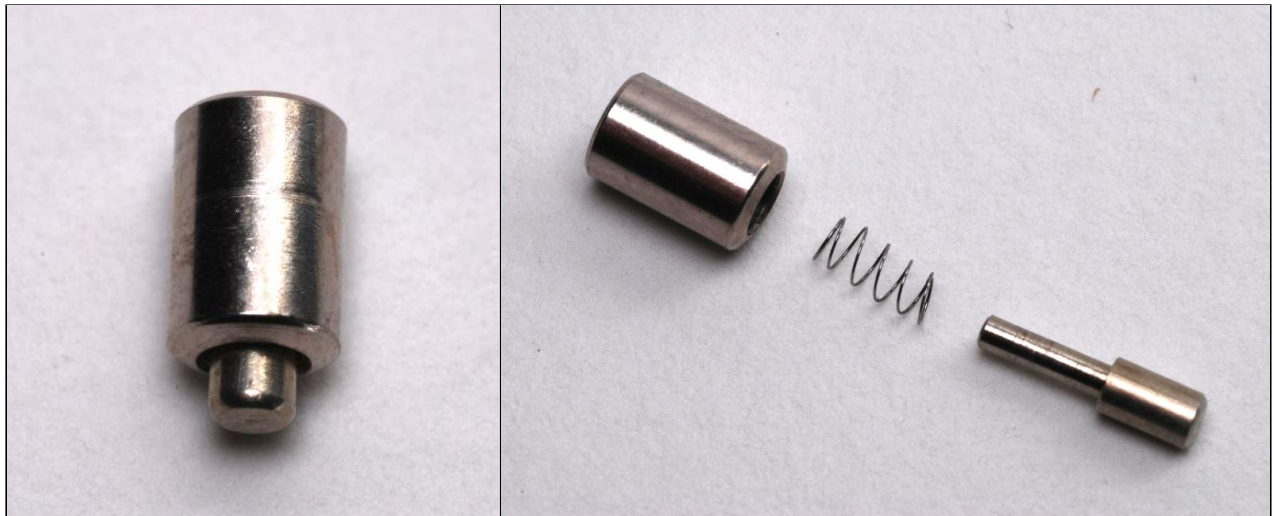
Assembled and exploded views of standard Classic driver pins
